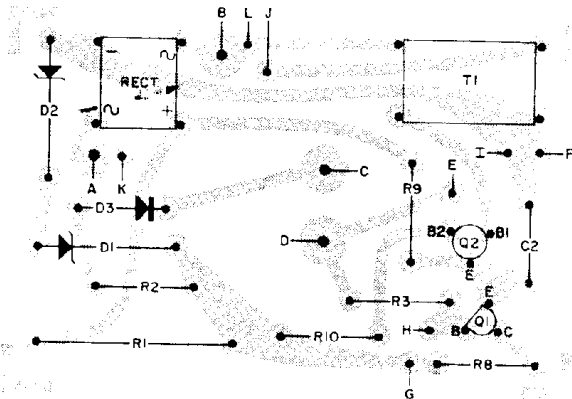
Observe proper polarities when mounting diodes, transistors, triac, and rectifier assembly.
